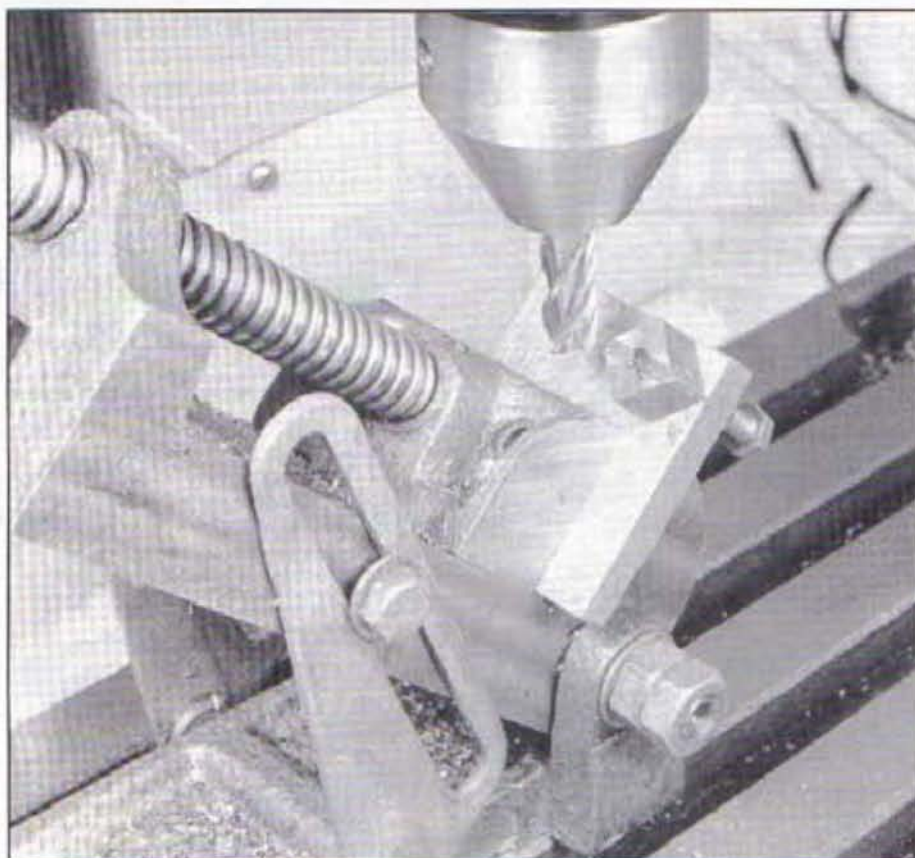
Milling the groove in the body using a plate in the angle vice as part of the set-up. The body was tapped ØBA about 3 threads deep and this gave sufficient hold. Other parts can be done in similar fashion.
